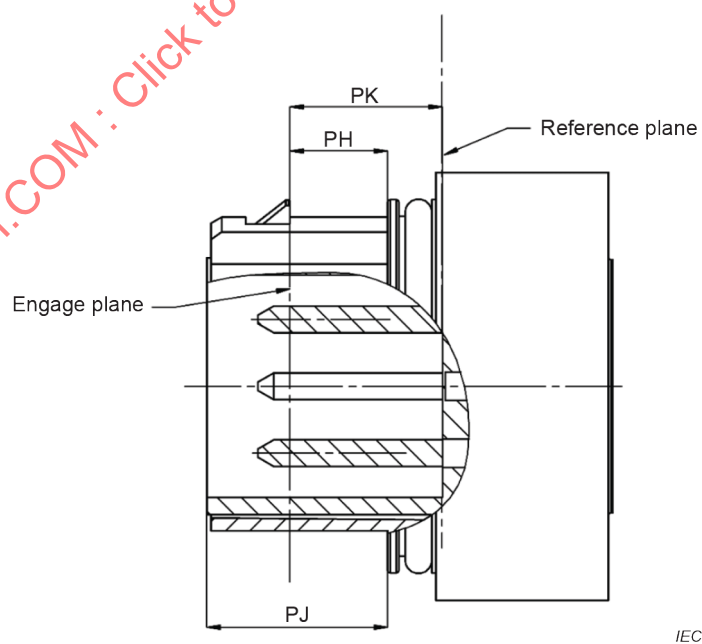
Side view of the male side of the push-pull housing using the example of a D-coded connector
